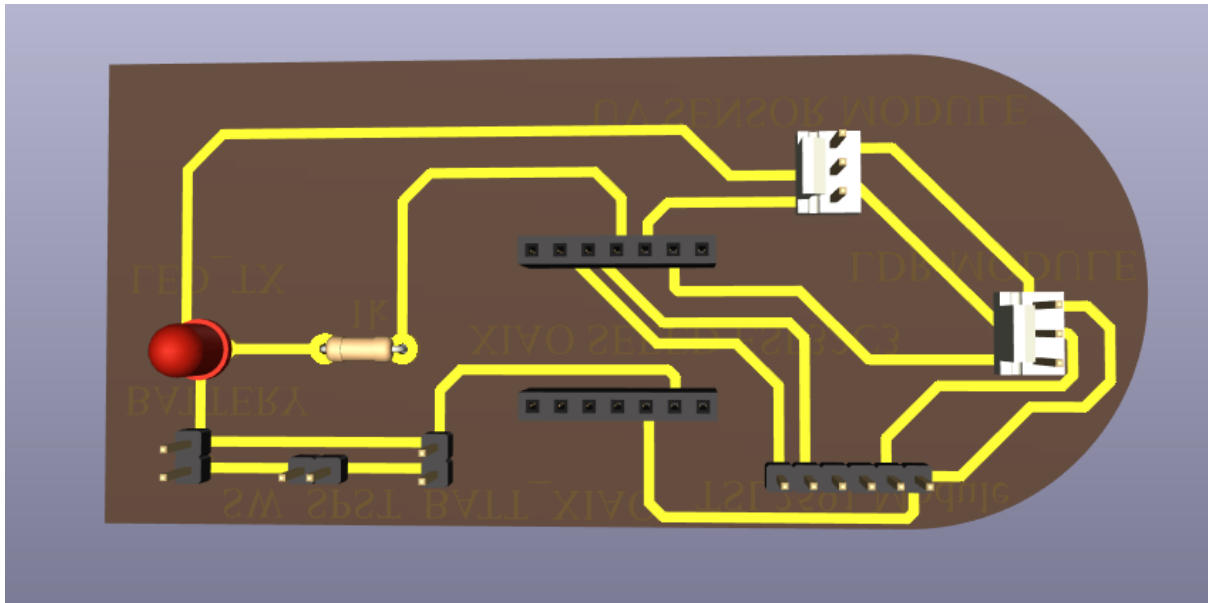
PCB In 3d Top View In Kicad PCB Editor
